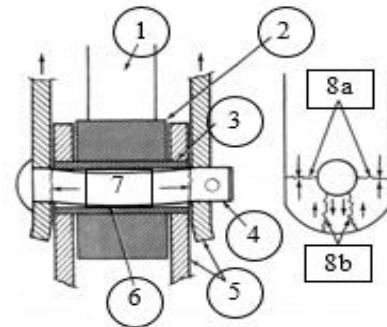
Roller chain components: 1:Sprocket; 2:Roller; 3:Bush; 4:Pin; 5:Plates; 6:Pin bending; 7:Pin Shear, 8a:Plate Tensile , 8b: Plate Shear. [2]
